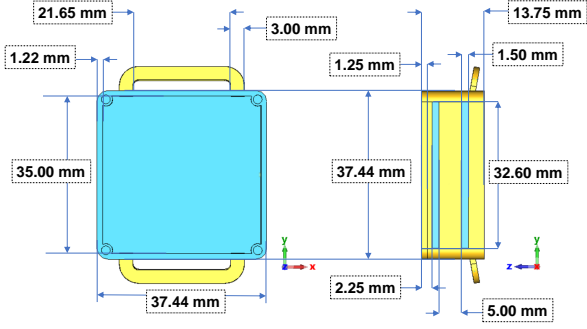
Major dimensions of the smartwatch design: top view (left) with the display part removed and side view (right) with the display.
